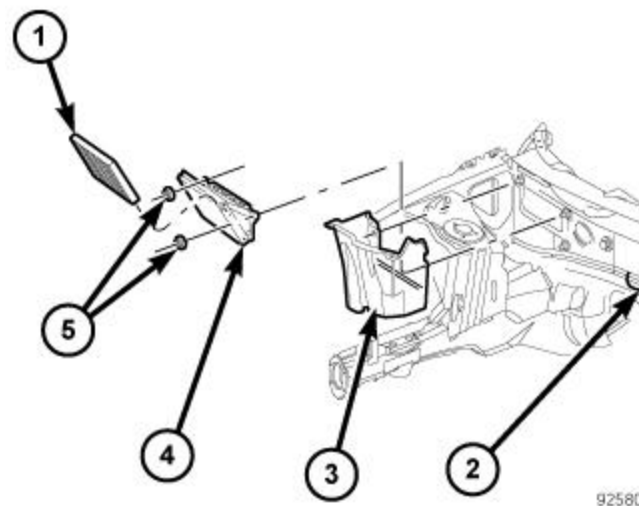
Air Inlet Housing, Cabin Air Filter, Filter Housing, Dash Panel & Nuts
